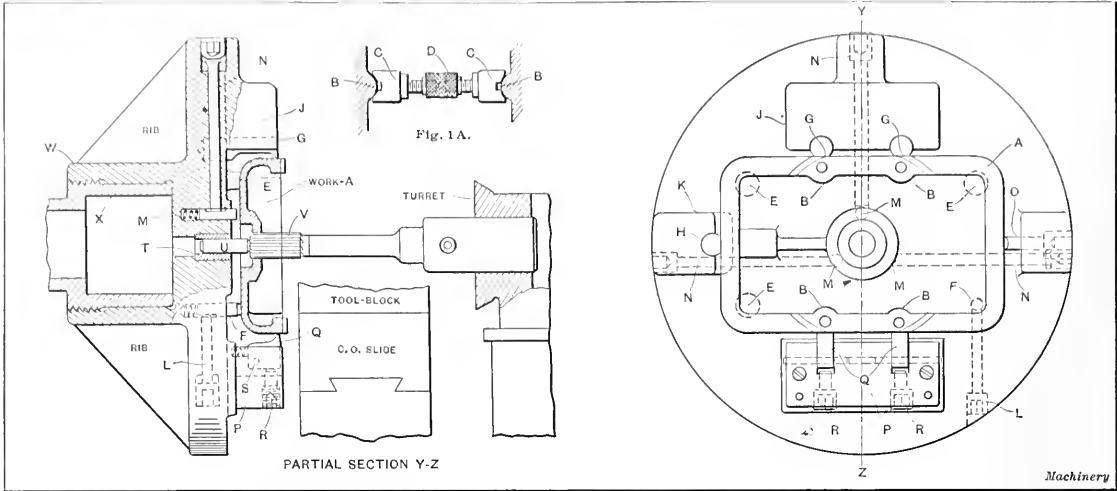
Chuck for Rectangular Aluminum Castings used on Horizontal Turret Lathe
